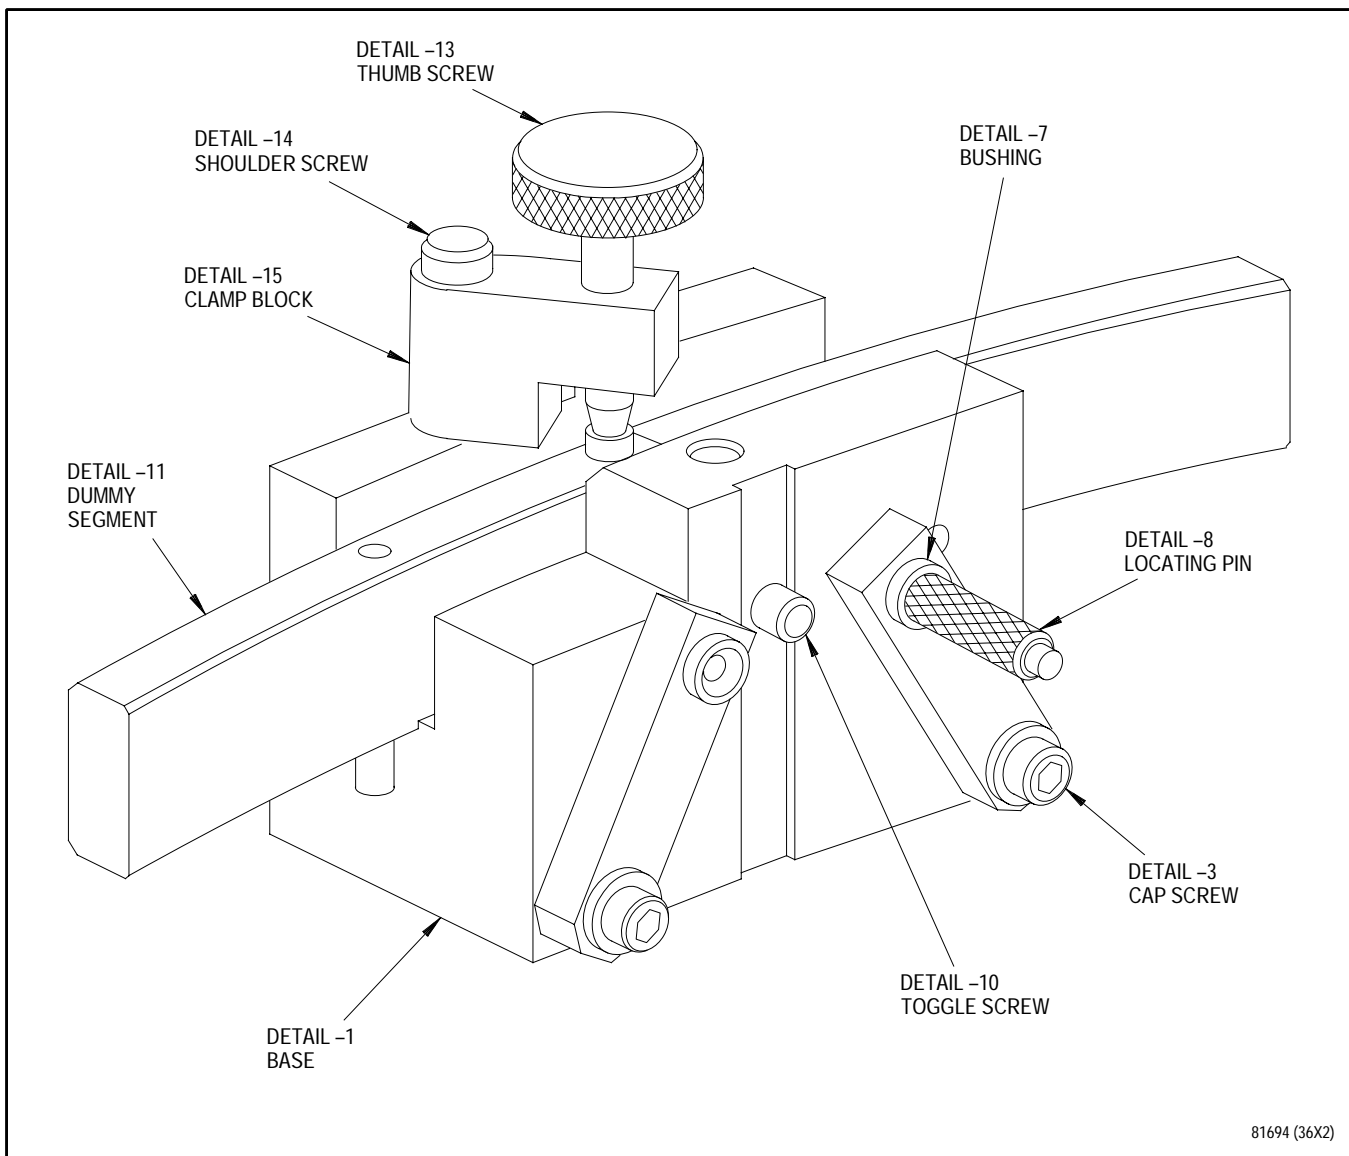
PWA 71494 Synchronizing Ring Drill Fixture.
